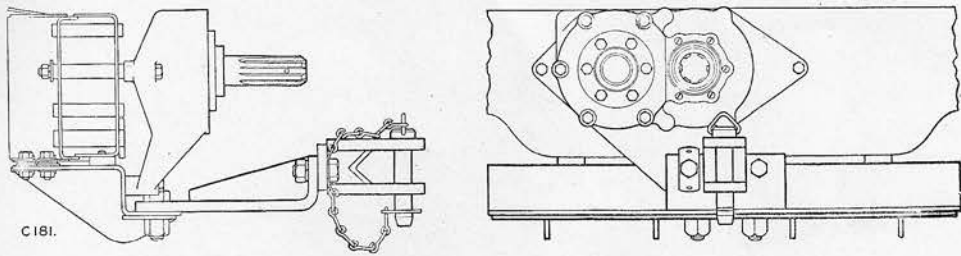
Extension plate for standard towing jaw Part No. 231498 as used when the standard towing jaw is required and a rear power take-off unit is fitted. The rear tow plates Part Nos. 231213 and 231214 are used in a similar manner and can only be fitted in conjunction with rear tow plate Part No. 501683. These plates are not applicable to the 109 Station Wagon.
